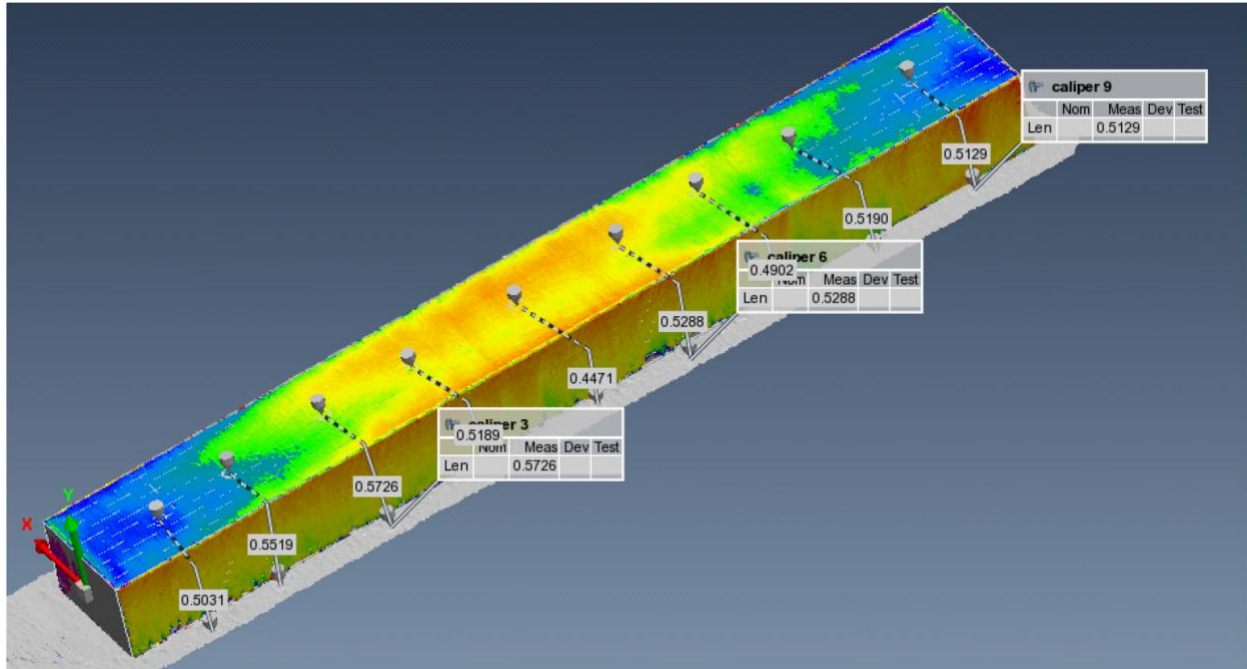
Standard Caliper tool features from the Faro Arm Edge provided displacement values of the surface to the CMM table
